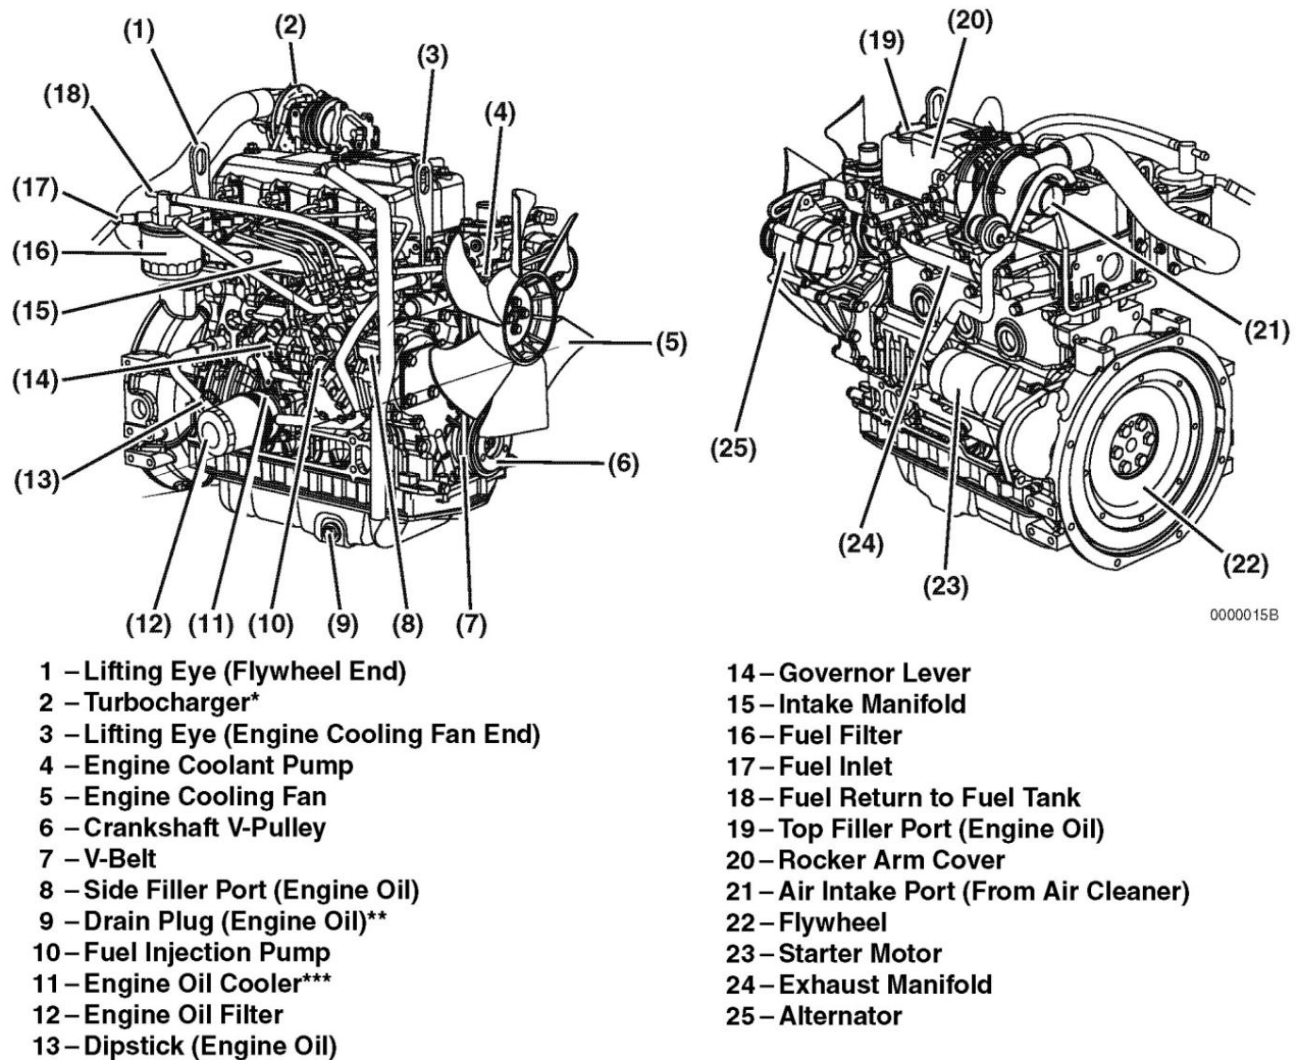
Engine right view (S4Q2 distributor-type fuel injection pump)
